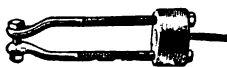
Open Cast-Iron Socket for Suspension Bridge and Cableway.
